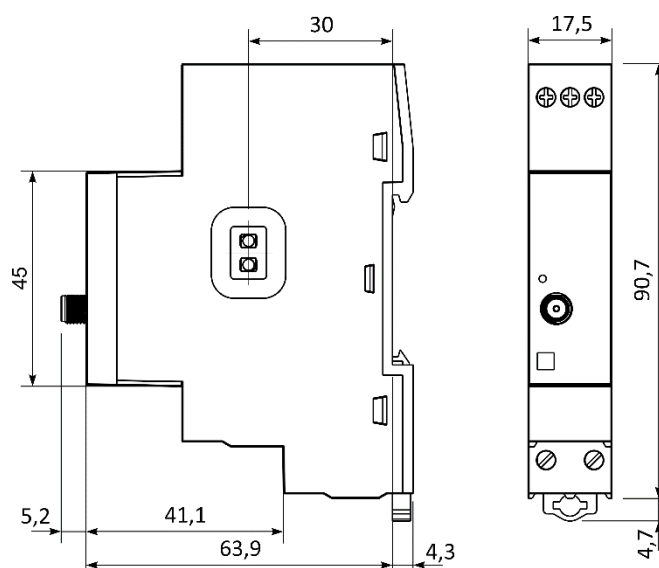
Dimensional drawings of SG-W1 with an external antenna.
